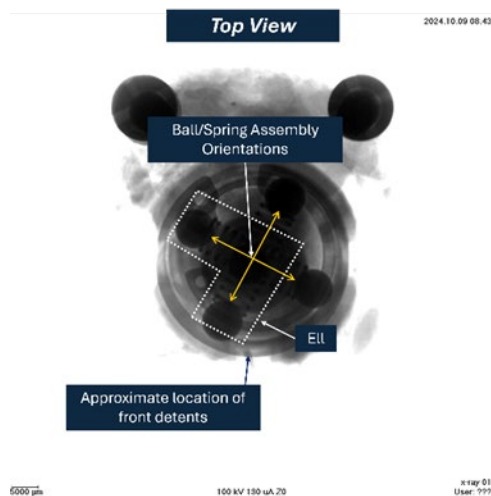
Top View of Fuel Selector with Ball/Spring Assembly Orientations and Front Detents
